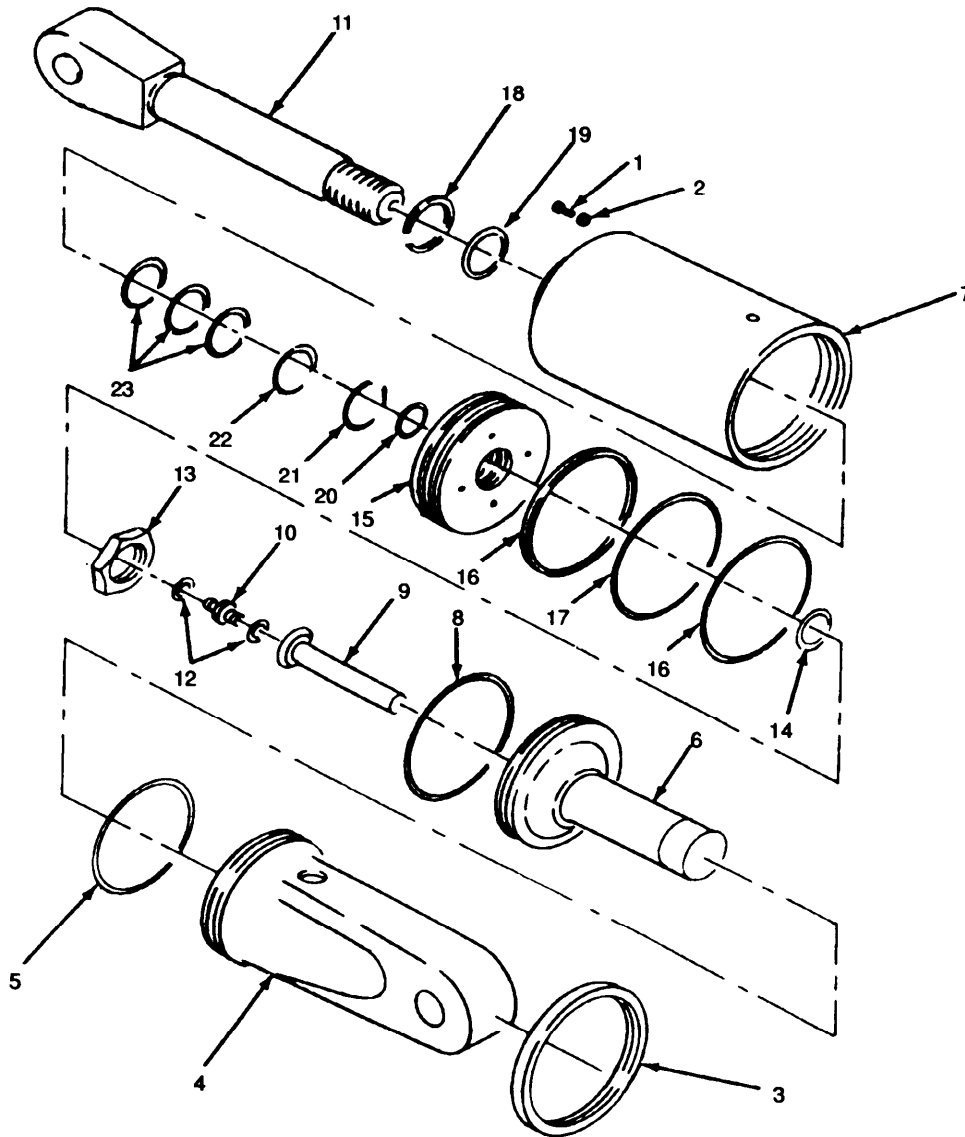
Hydraulic Cylinder and Piston, Repair.
